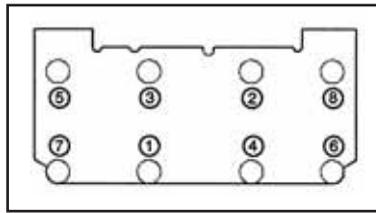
Revised cylinder head torque sequence for 2001-2002 GM 3.1L and 3.4L engines.
